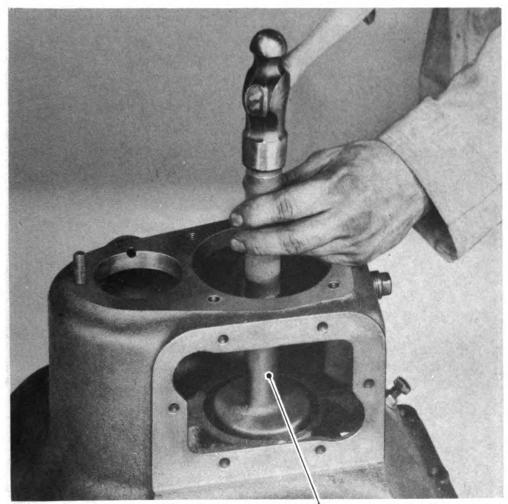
Removing Pinion Low Speed Gear Bearing Sleeve and Thrust Washer
